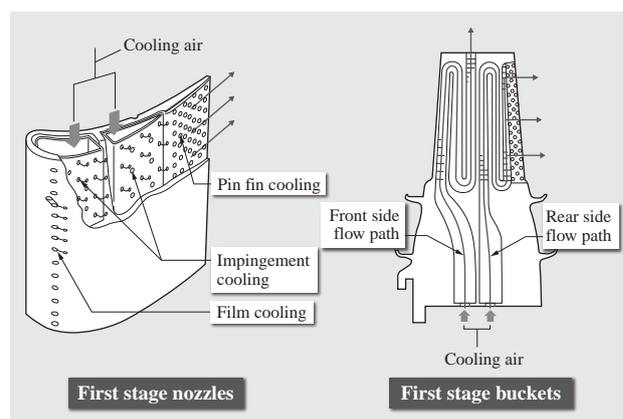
Turbine Blade Cooling Mechanism for H-25 Gas Turbine.
